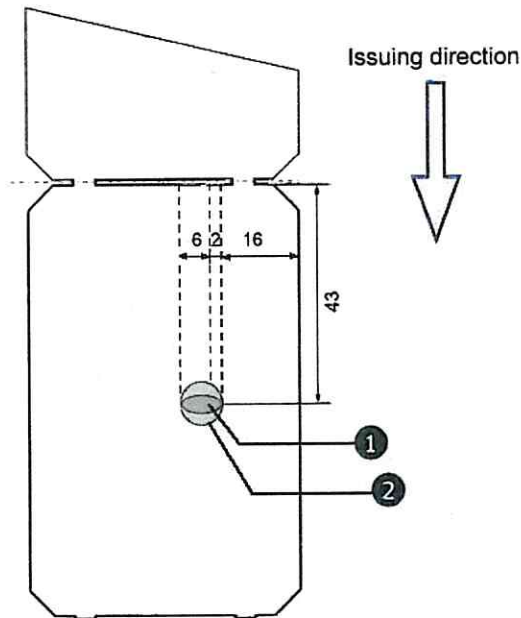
Punching area for ticket holes (MC 120 Barcode); Dimensions in mm
